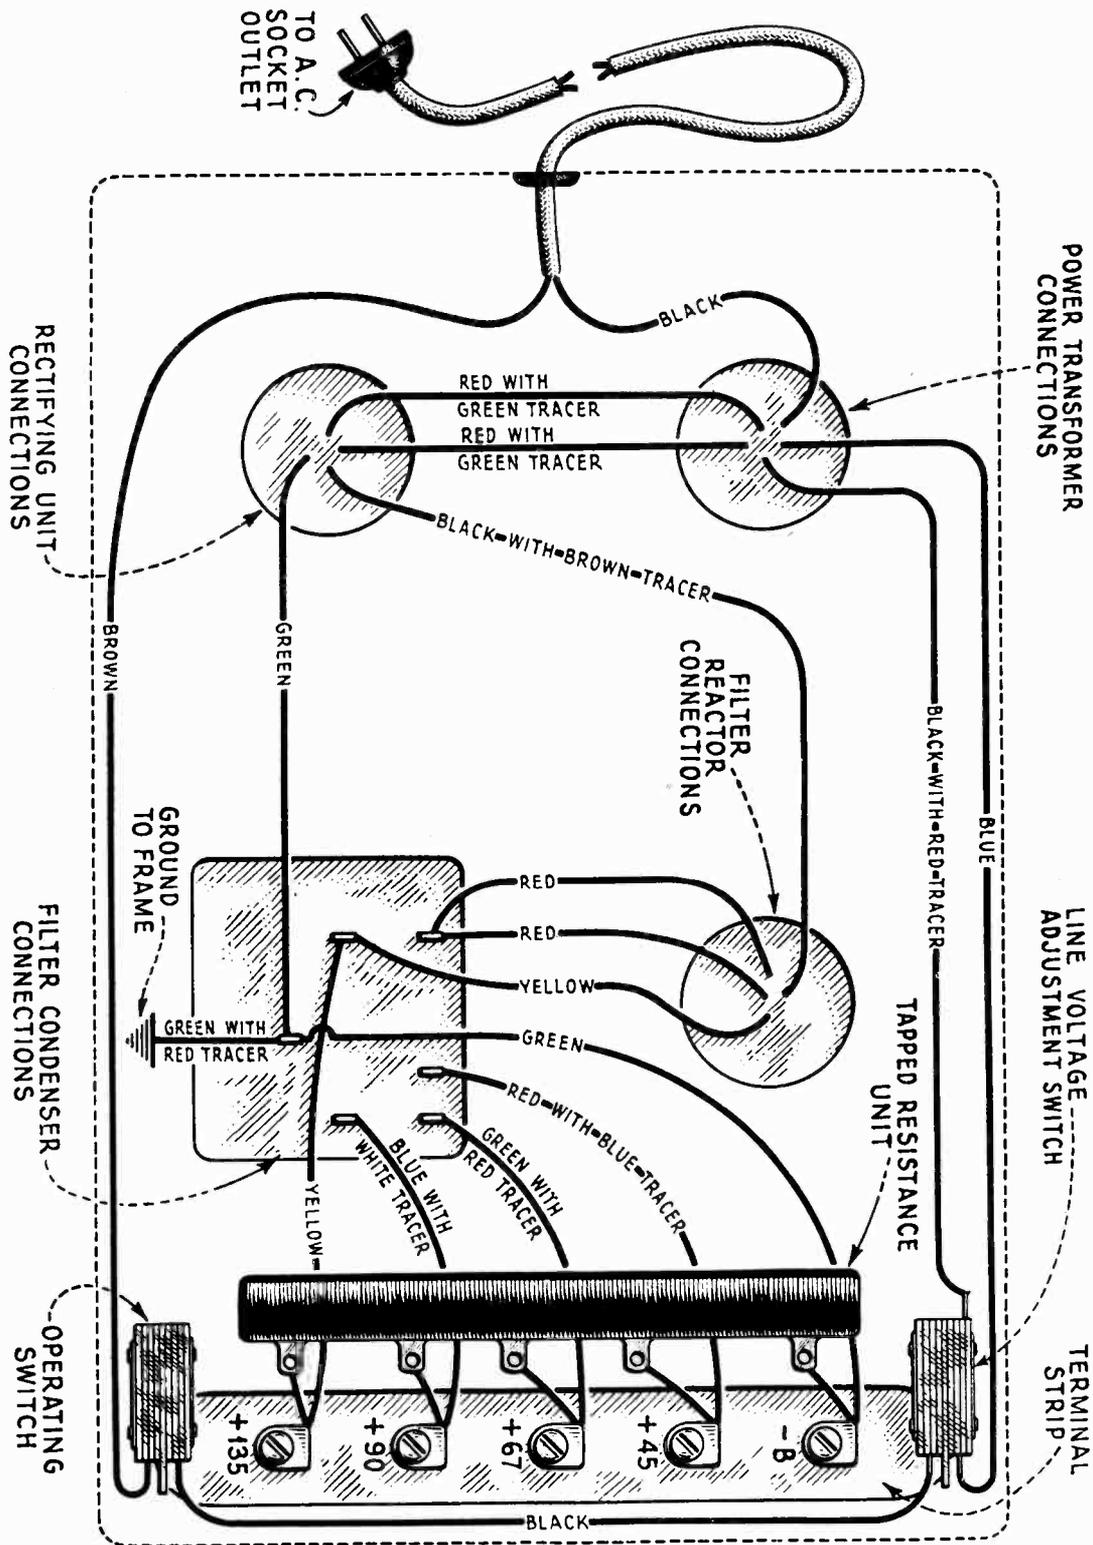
Sub-chassis view of the RCA B-Eliminator showing color scheme of wiring and connections
